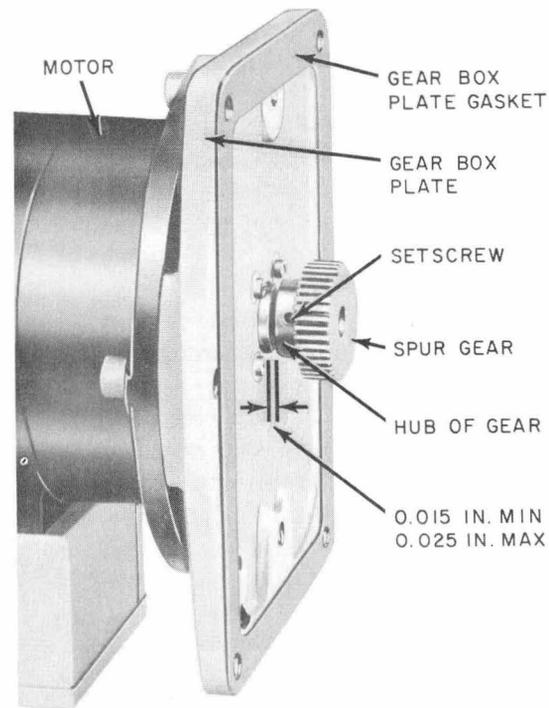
Clearance Between Hub of Gear and Oil Seal
